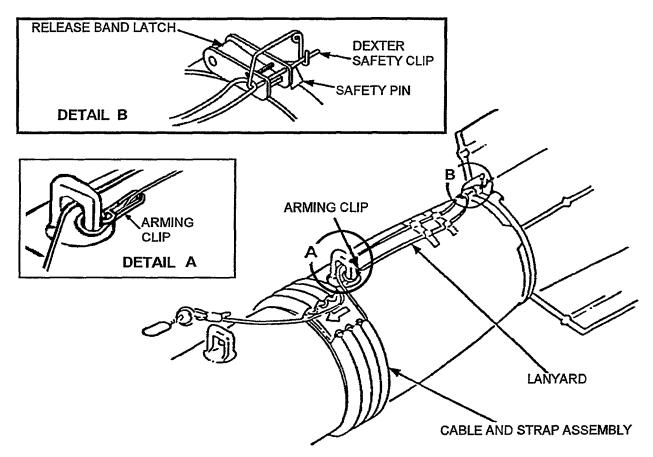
G. Cable and Strap Assembly Installation (P-3 Aircraft)
